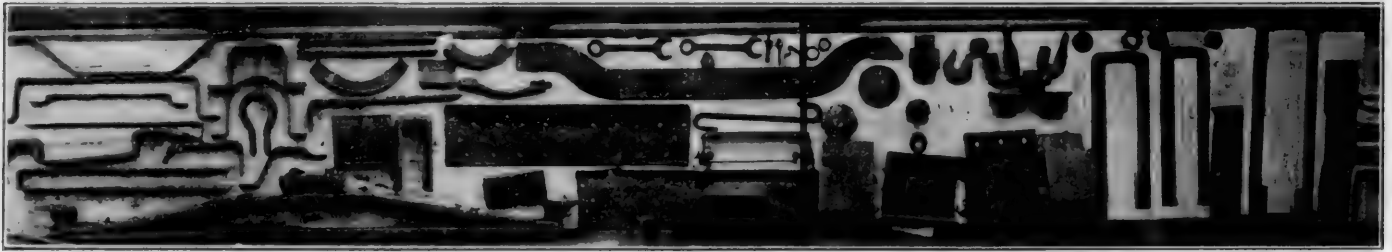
EXAMPLES OF WORK DONE ON FORGING MACHINES AND BULLDOZERS AT TOPEKA.
